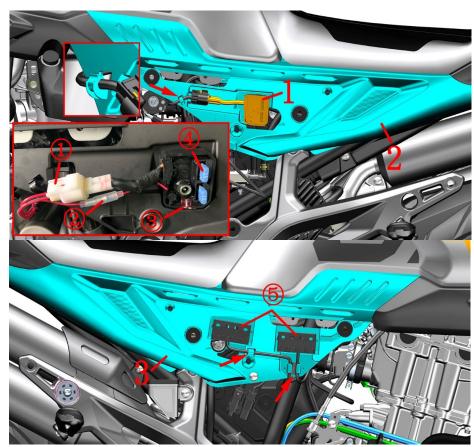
SIDE COVER COMPONENT		Side cover component 2	CHK	(4)
